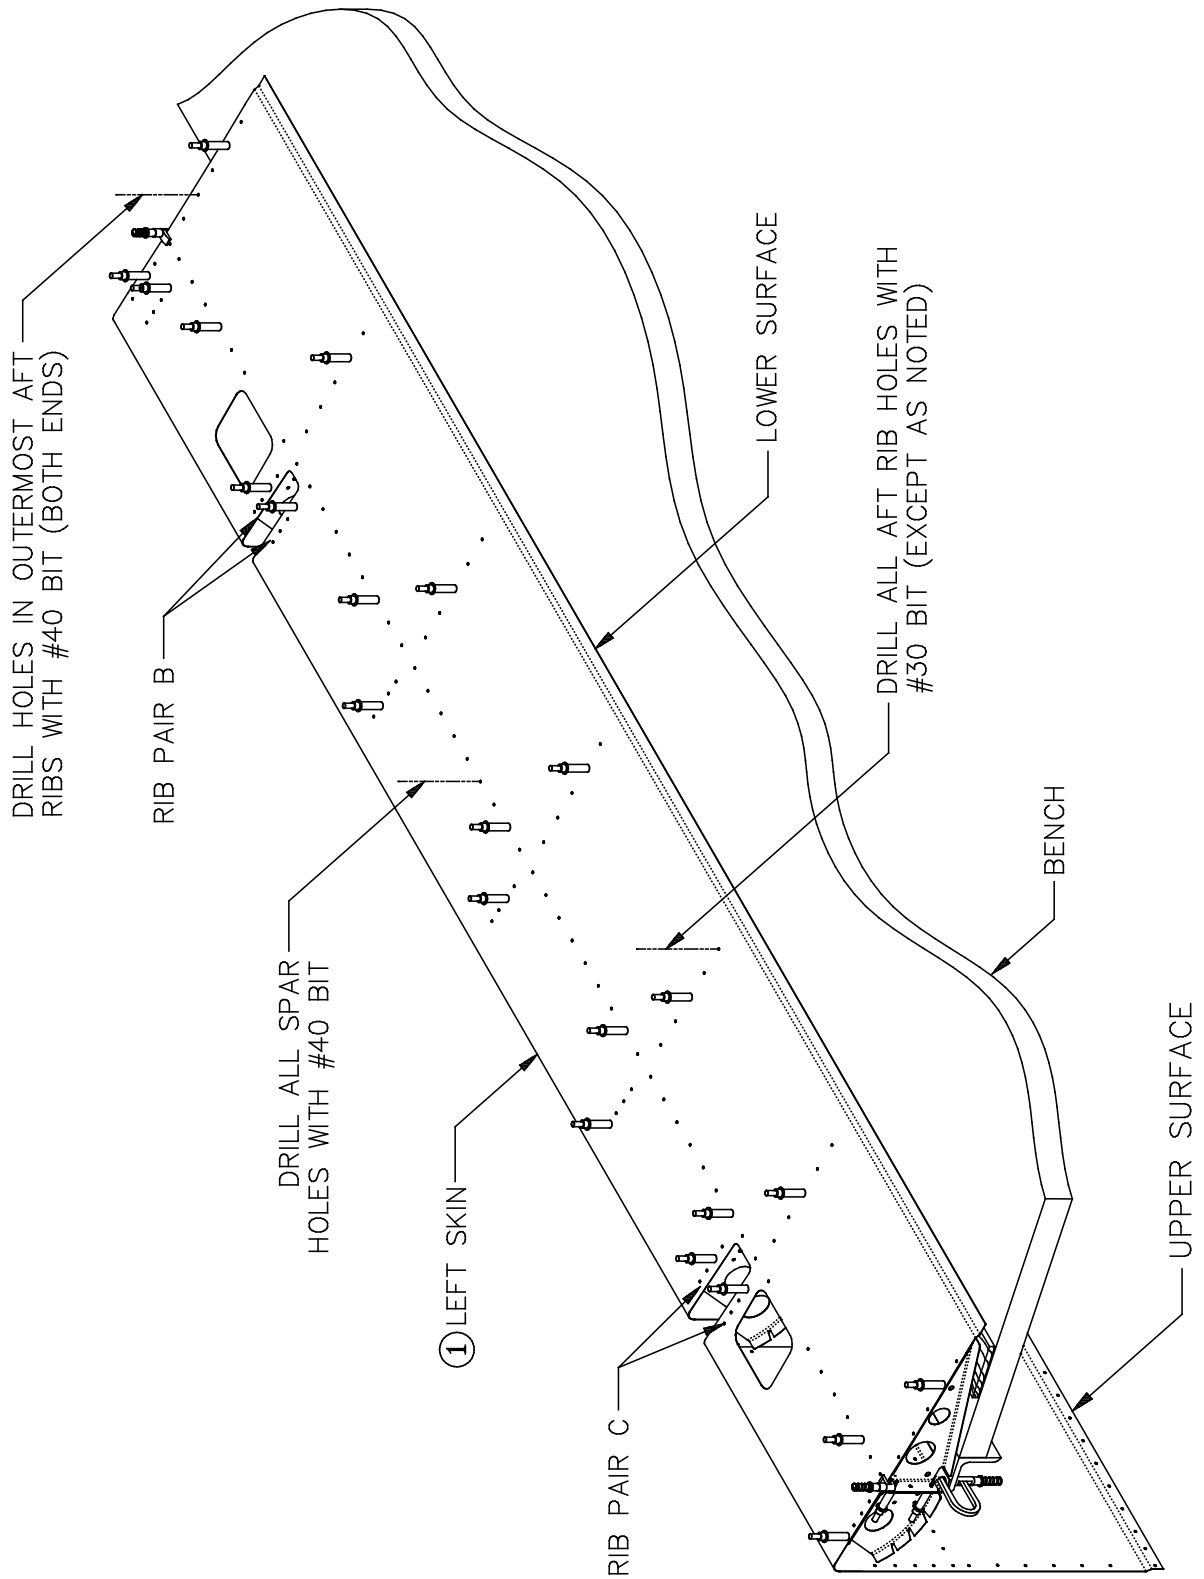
Positioning the Skin and Drilling the Lower-Surface Spar and Aft Rib Holes
